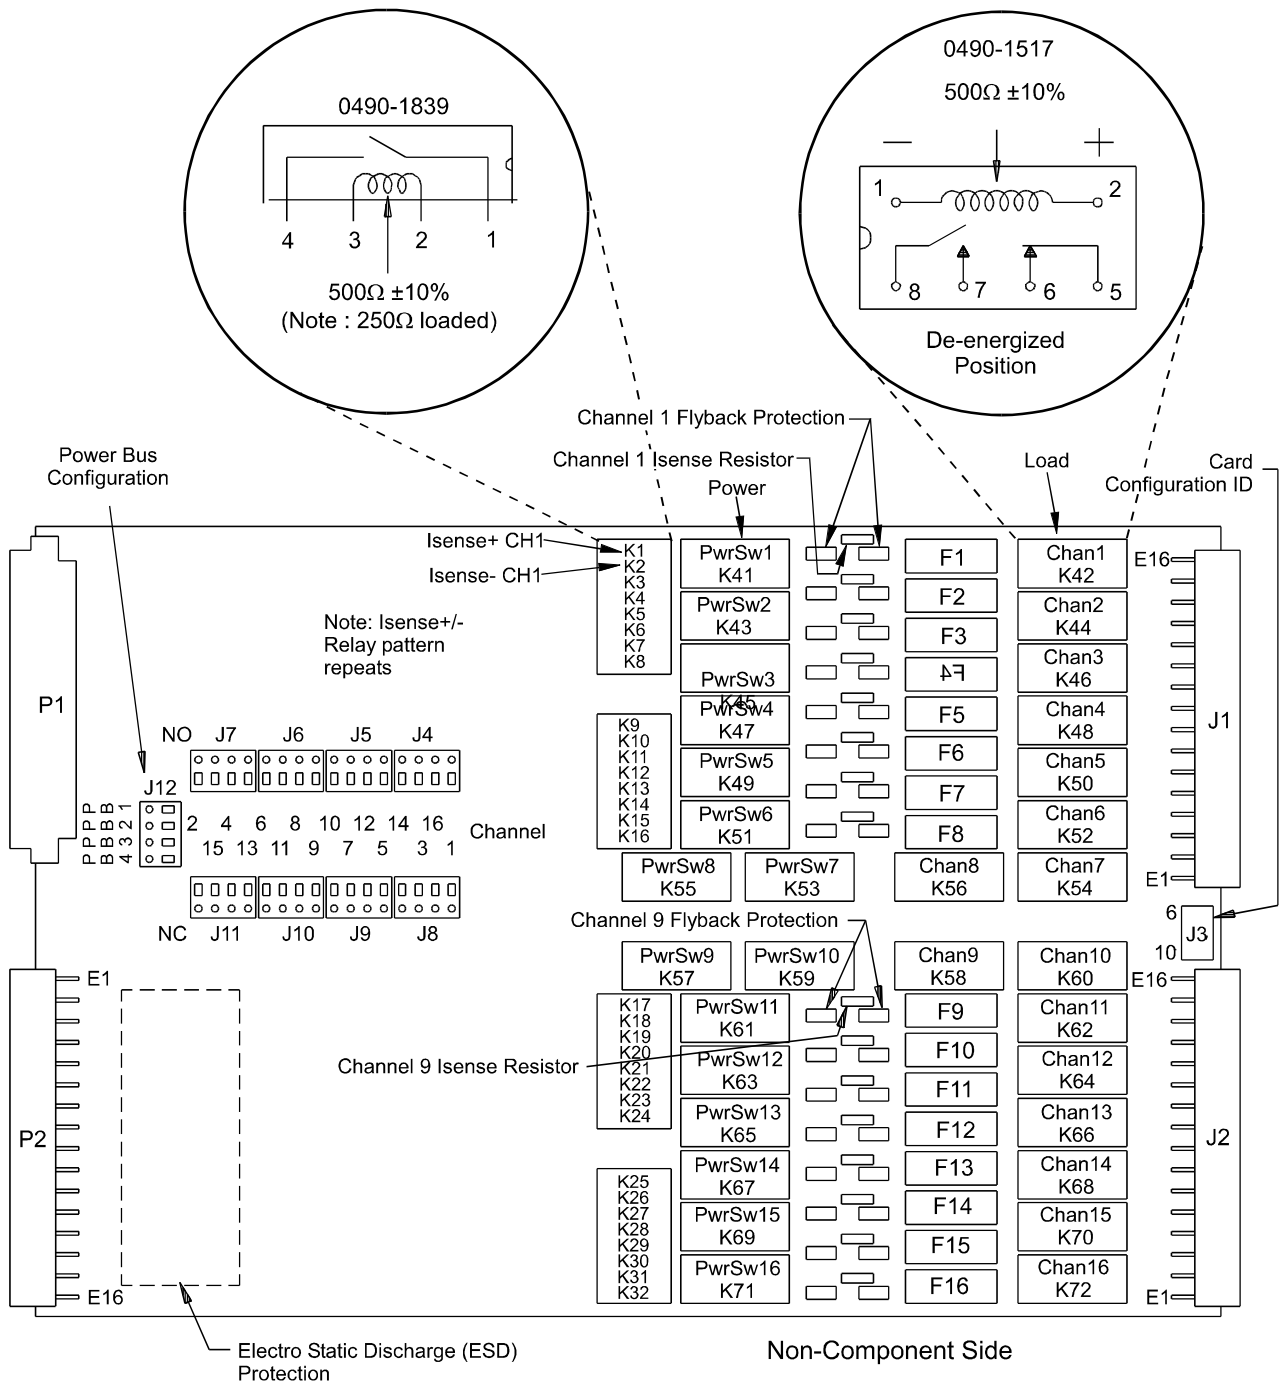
HP E6176A 16-Channel Load Card Component Locator (Rear View)
